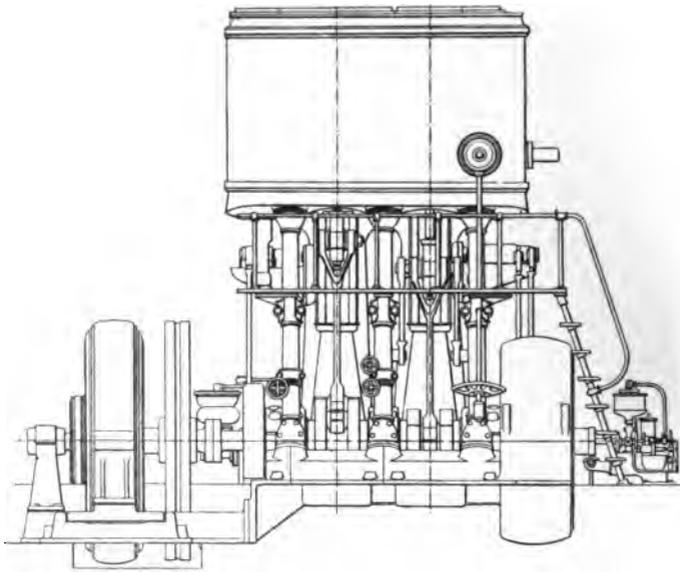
800 H.P. "FRANCO TOSI" ENGINE.
